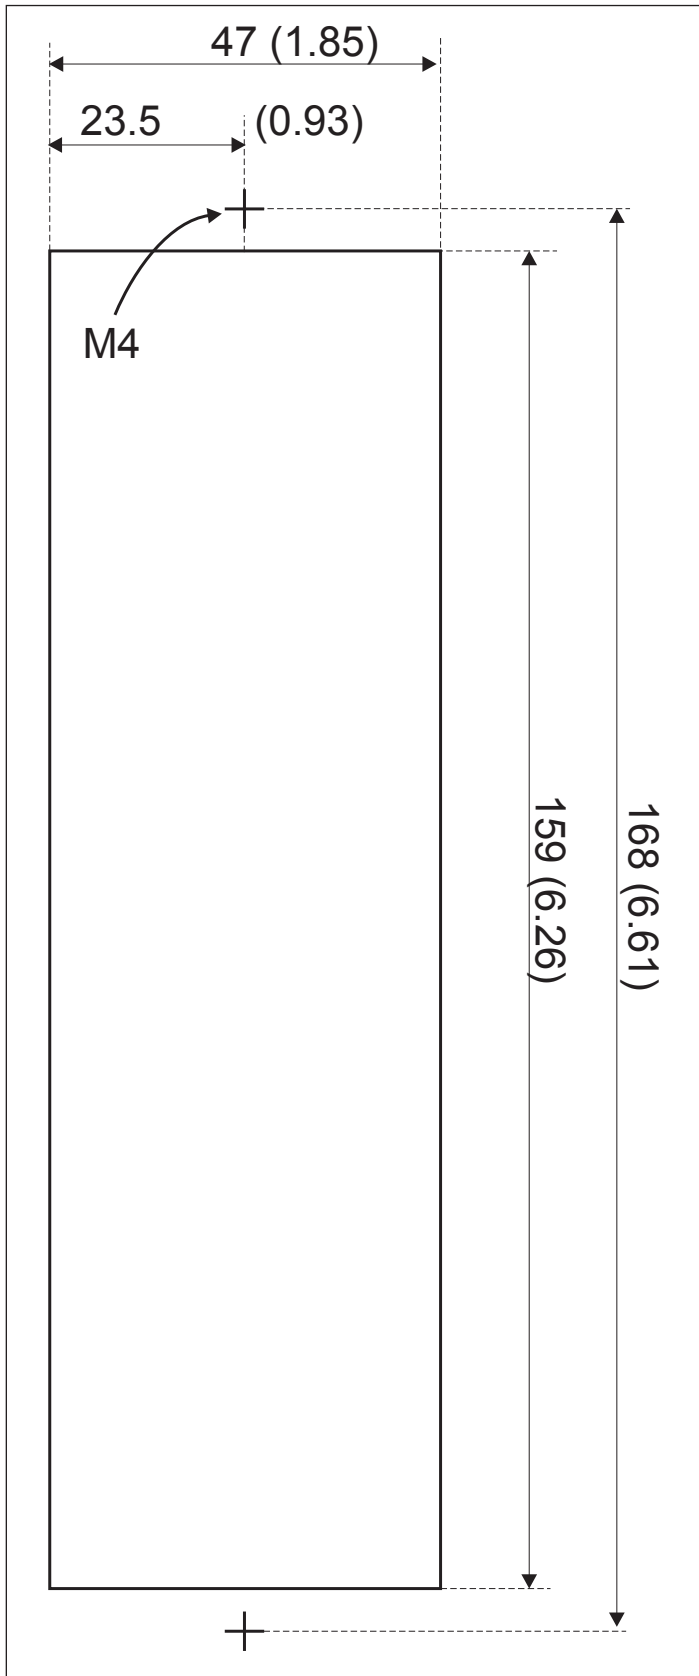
EAFR-101C cut out for panel mounting (mm [in.]).
